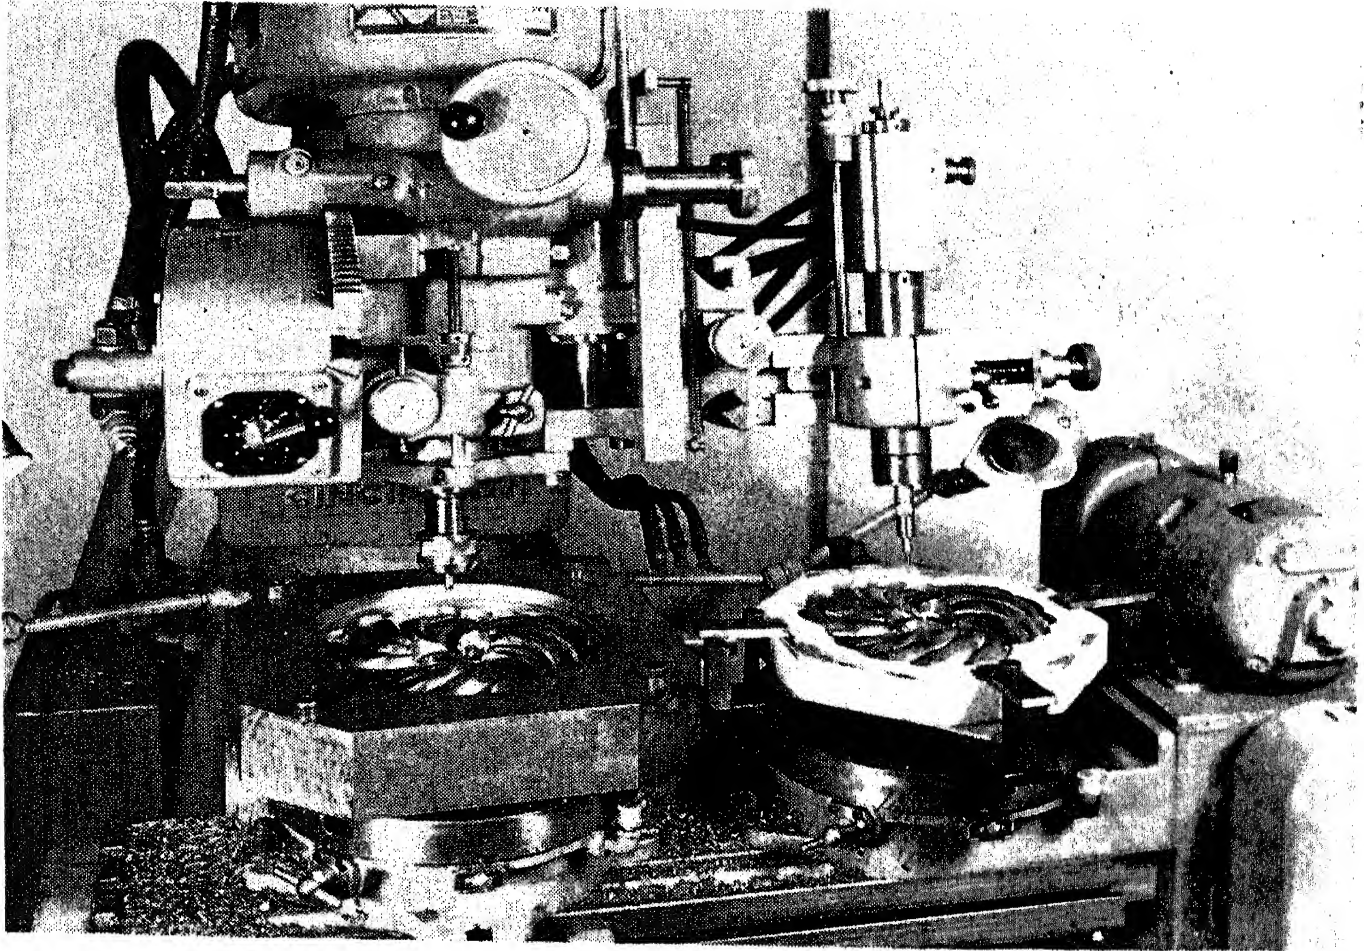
An 8 in. by 18 in. tool and die milling machine equipped with a duplex rotary power driven table attachment. (Courtesy The Cincinnati Milling Machine Co.)
